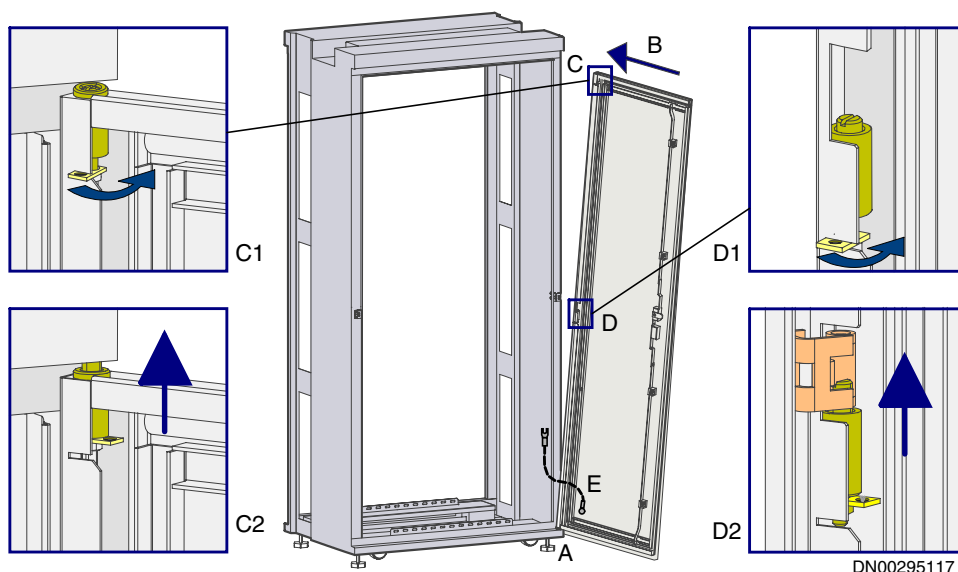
Reinstalling a cabinet door. The details show the steps detailed below.
